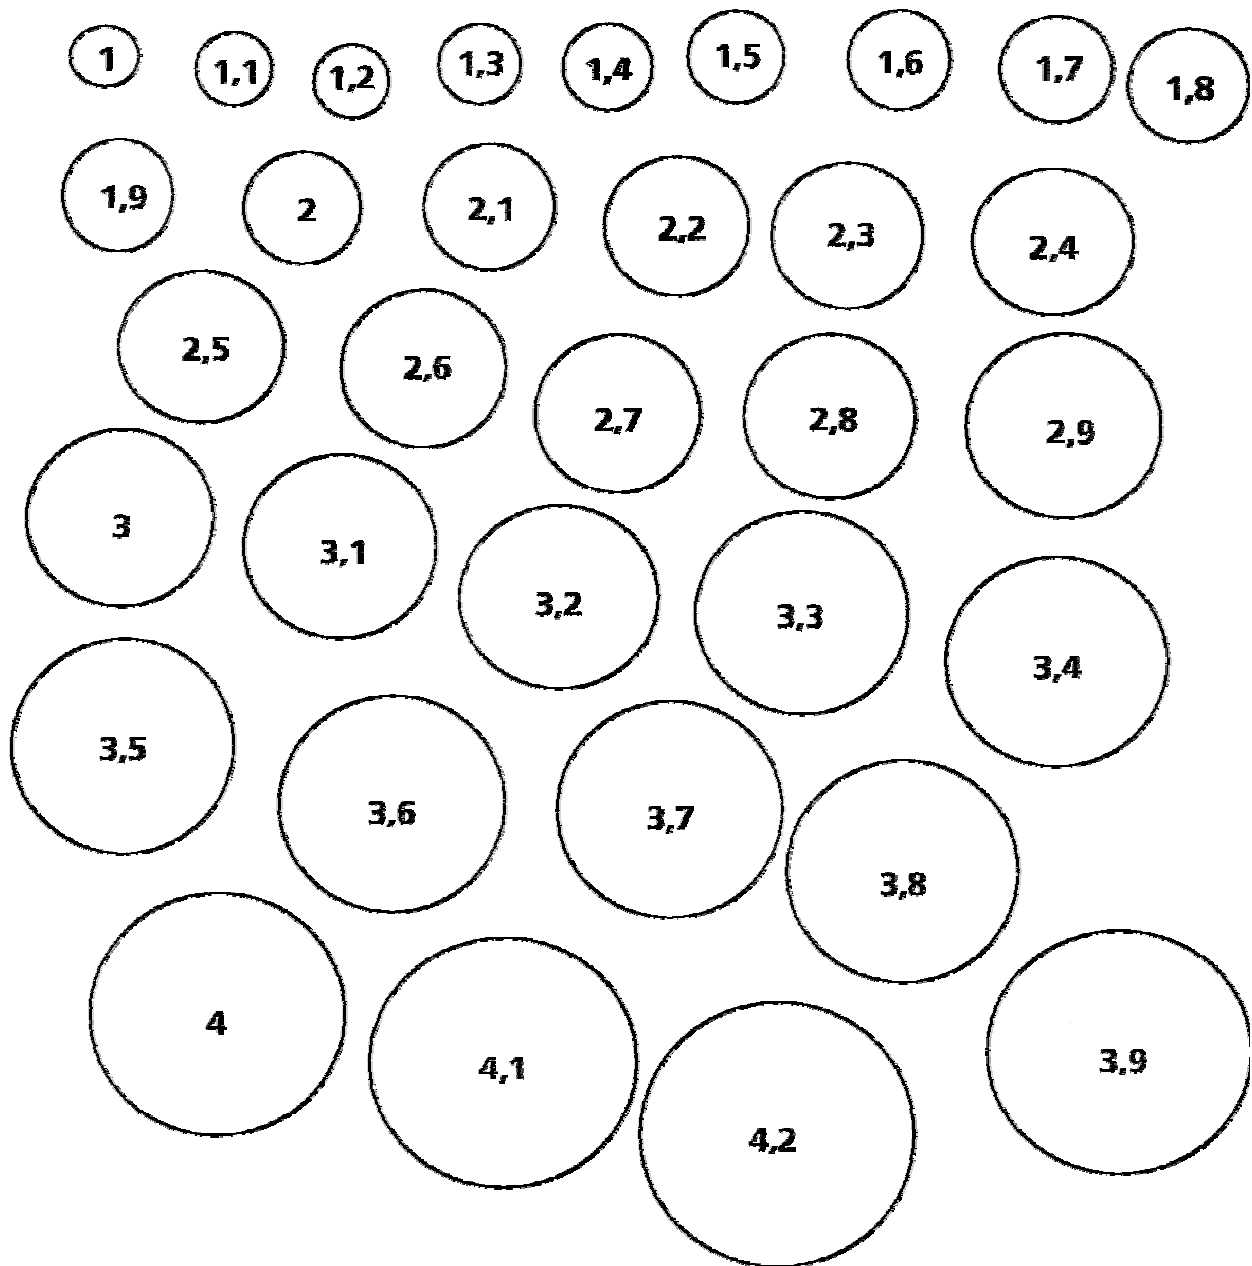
Sized circles for measuring weld toe radius (For illustration only, not to consistent scale)
